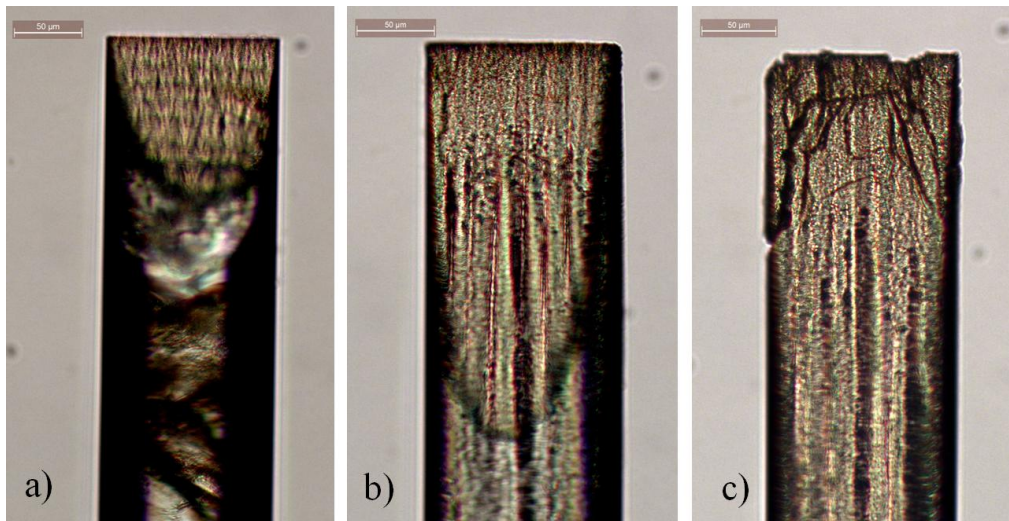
a) Fibre machined with infrared laser incident from the top, showing good machining on the top while the bottom part cracked; b) fibre machined with UV, no obvious cracking of the fibre.
